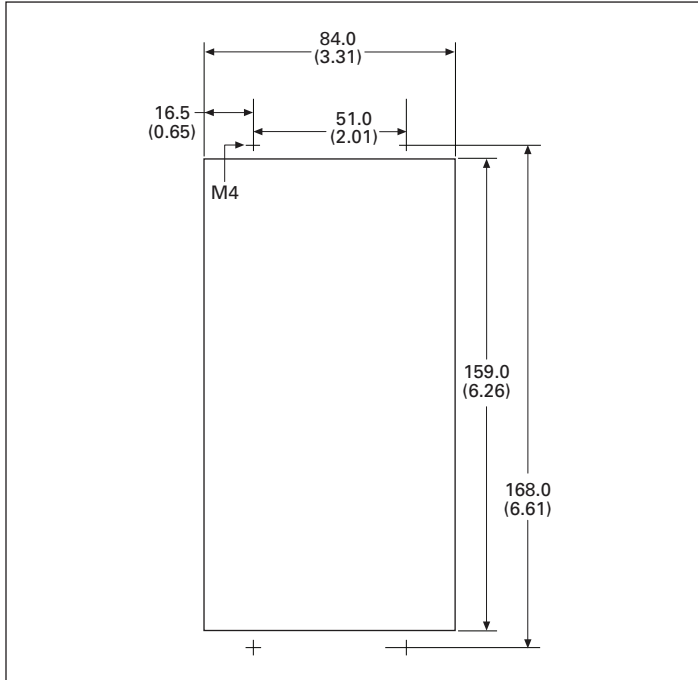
EAFR-110PLV cutout for panel mounting in millimeters (inches)
